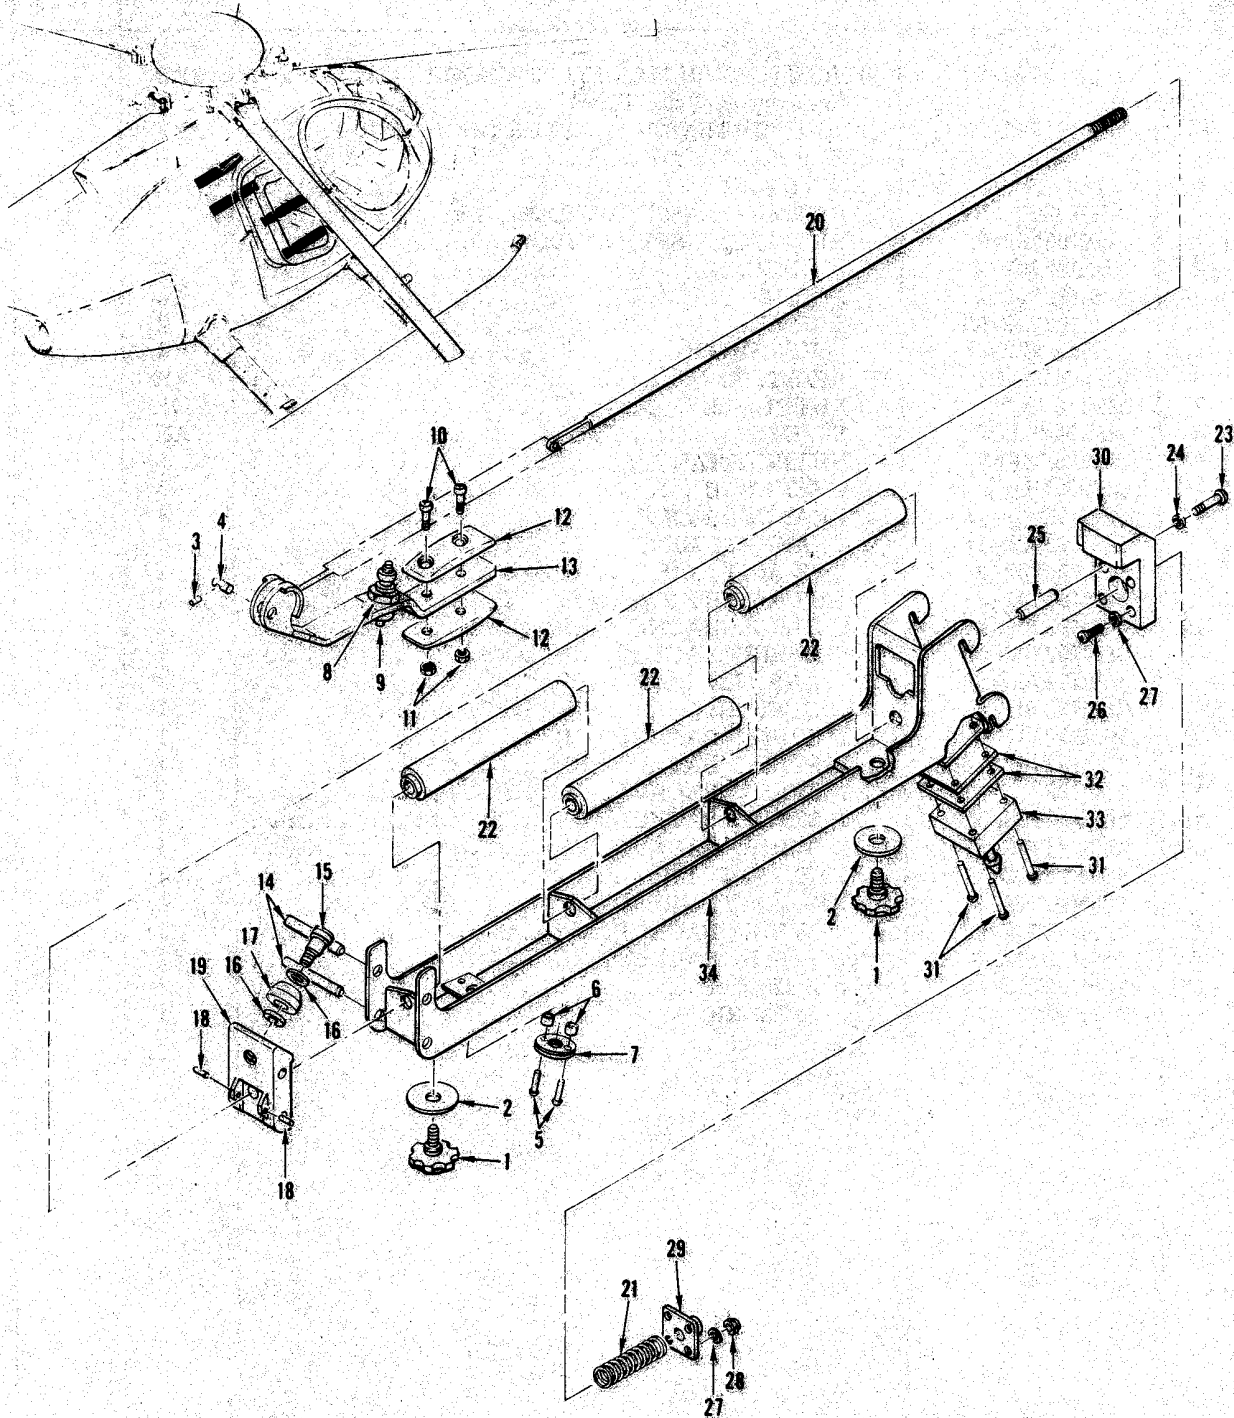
Litter door structural installation (sheet 1 of 2)
